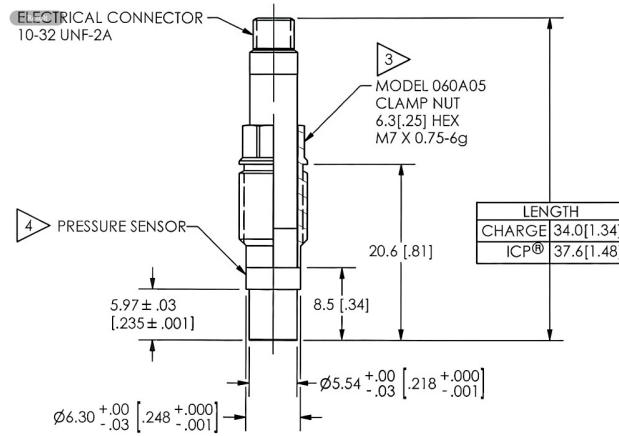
Piezoelectric sensor PCB 113B28 dimensions as provided by the manufacturer. Dimensions outside of square brackets are in millimeters.
